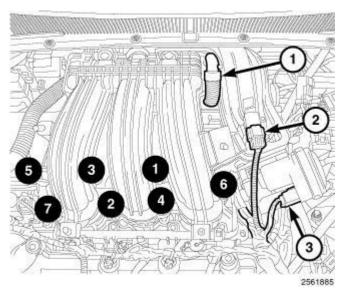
Locating Manifold Bolts, Manifold Absolute Pressure Sensor & Electronic Throttle Control Electrical Connectors
